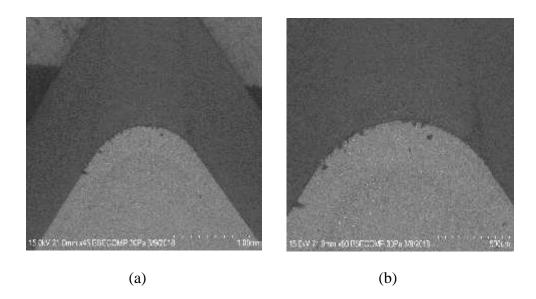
(a) Image of new ceramic insert before machining (b) Close-up view of insert
